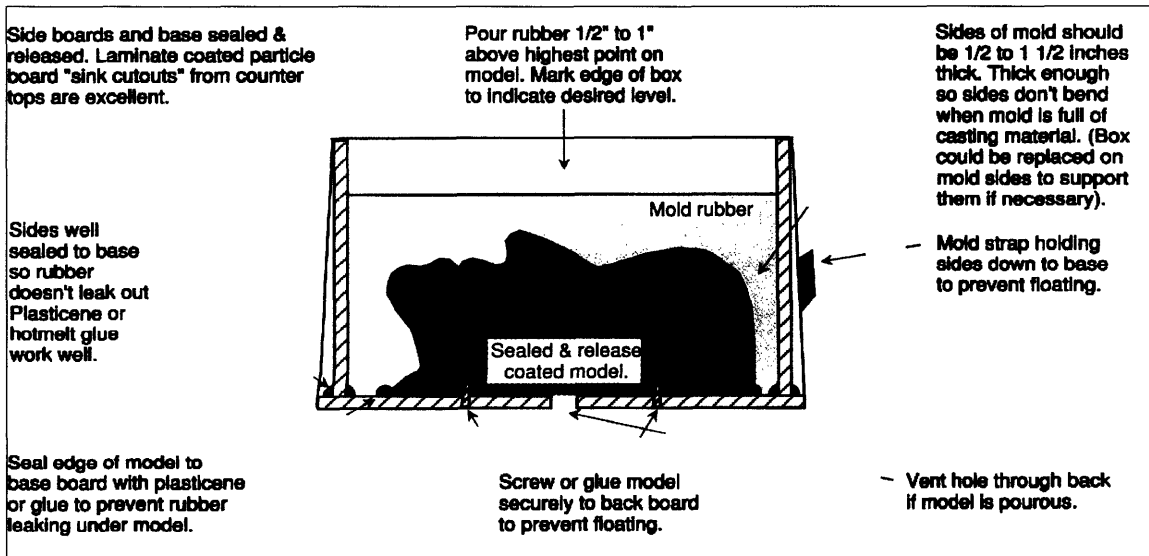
One Piece Poured Mold [10]. The simplest mold is the one-piece poured mold. Basic instructions and a schematic explain how to make a one-piece poured mold.
